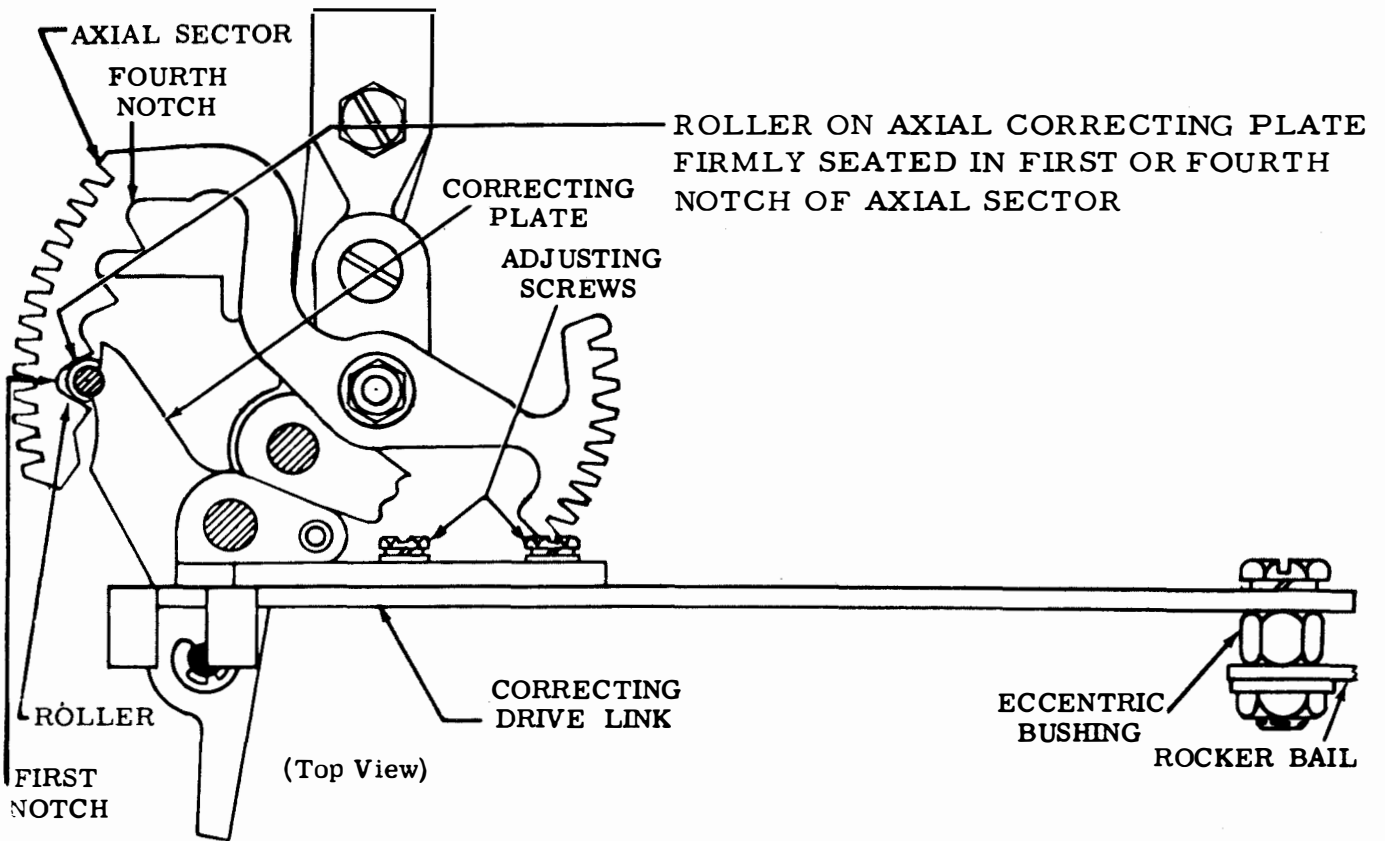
Correcting Drive Link (nonyielding) - Top View
